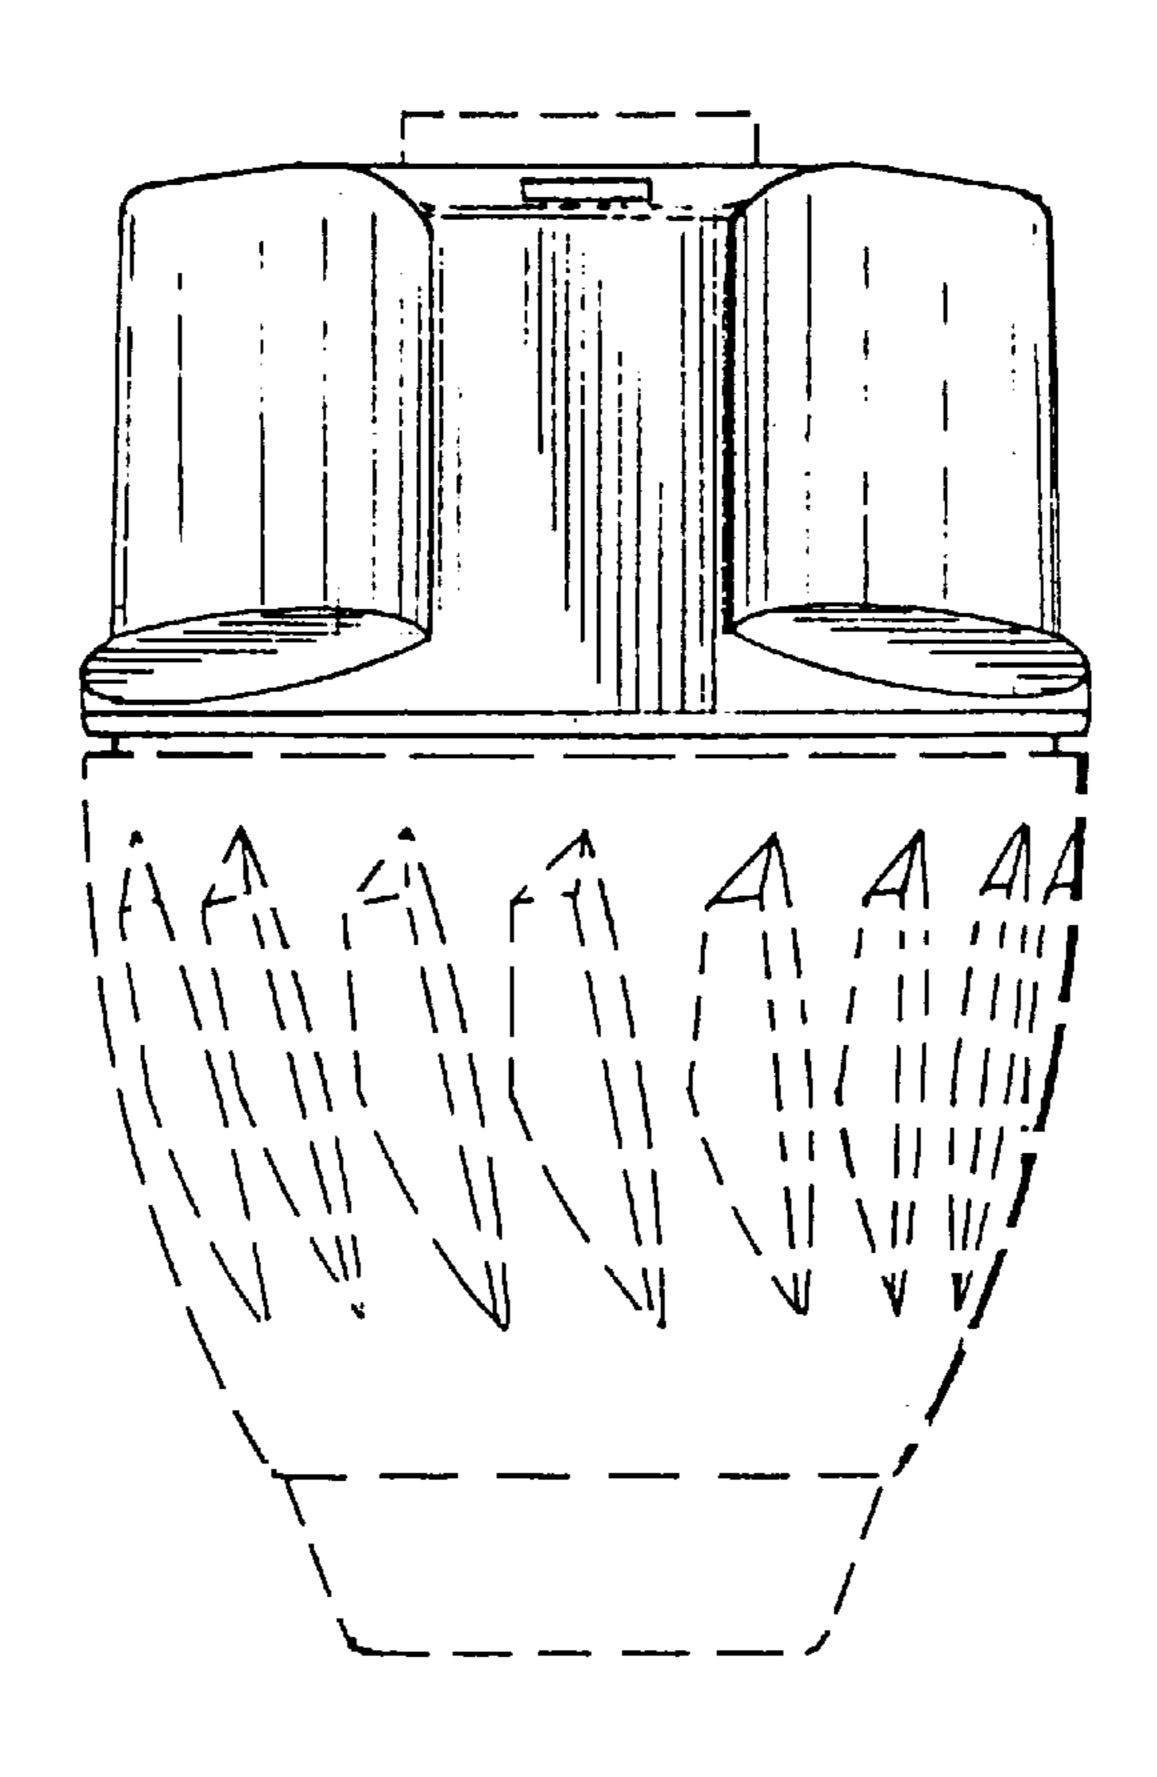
is a rear perspective view of the multi-lobal rear chuck sleeve as illustrated in FIG. 1.
